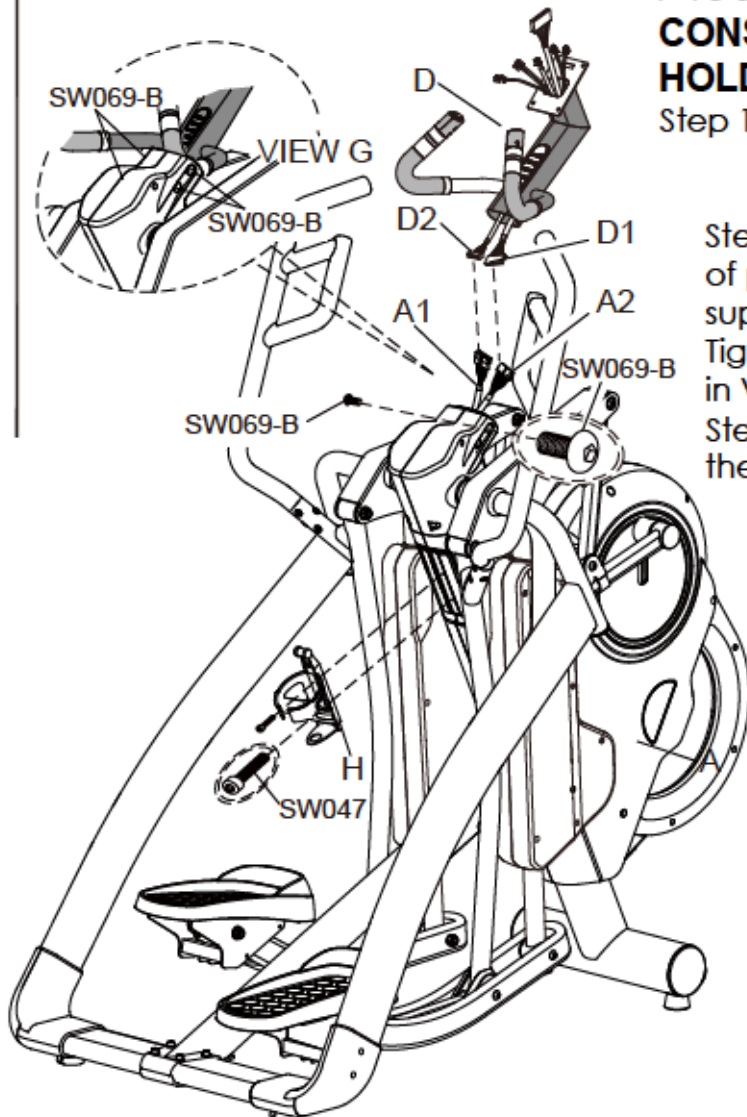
CONSOLE SUPPORTING TUBE AND BOTTLE HOLDER ASSEMBLY
